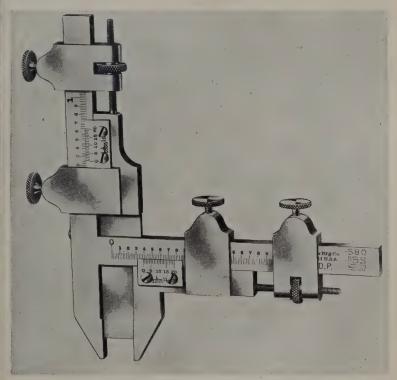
Measuring gear teeth with a vernier caliper.
